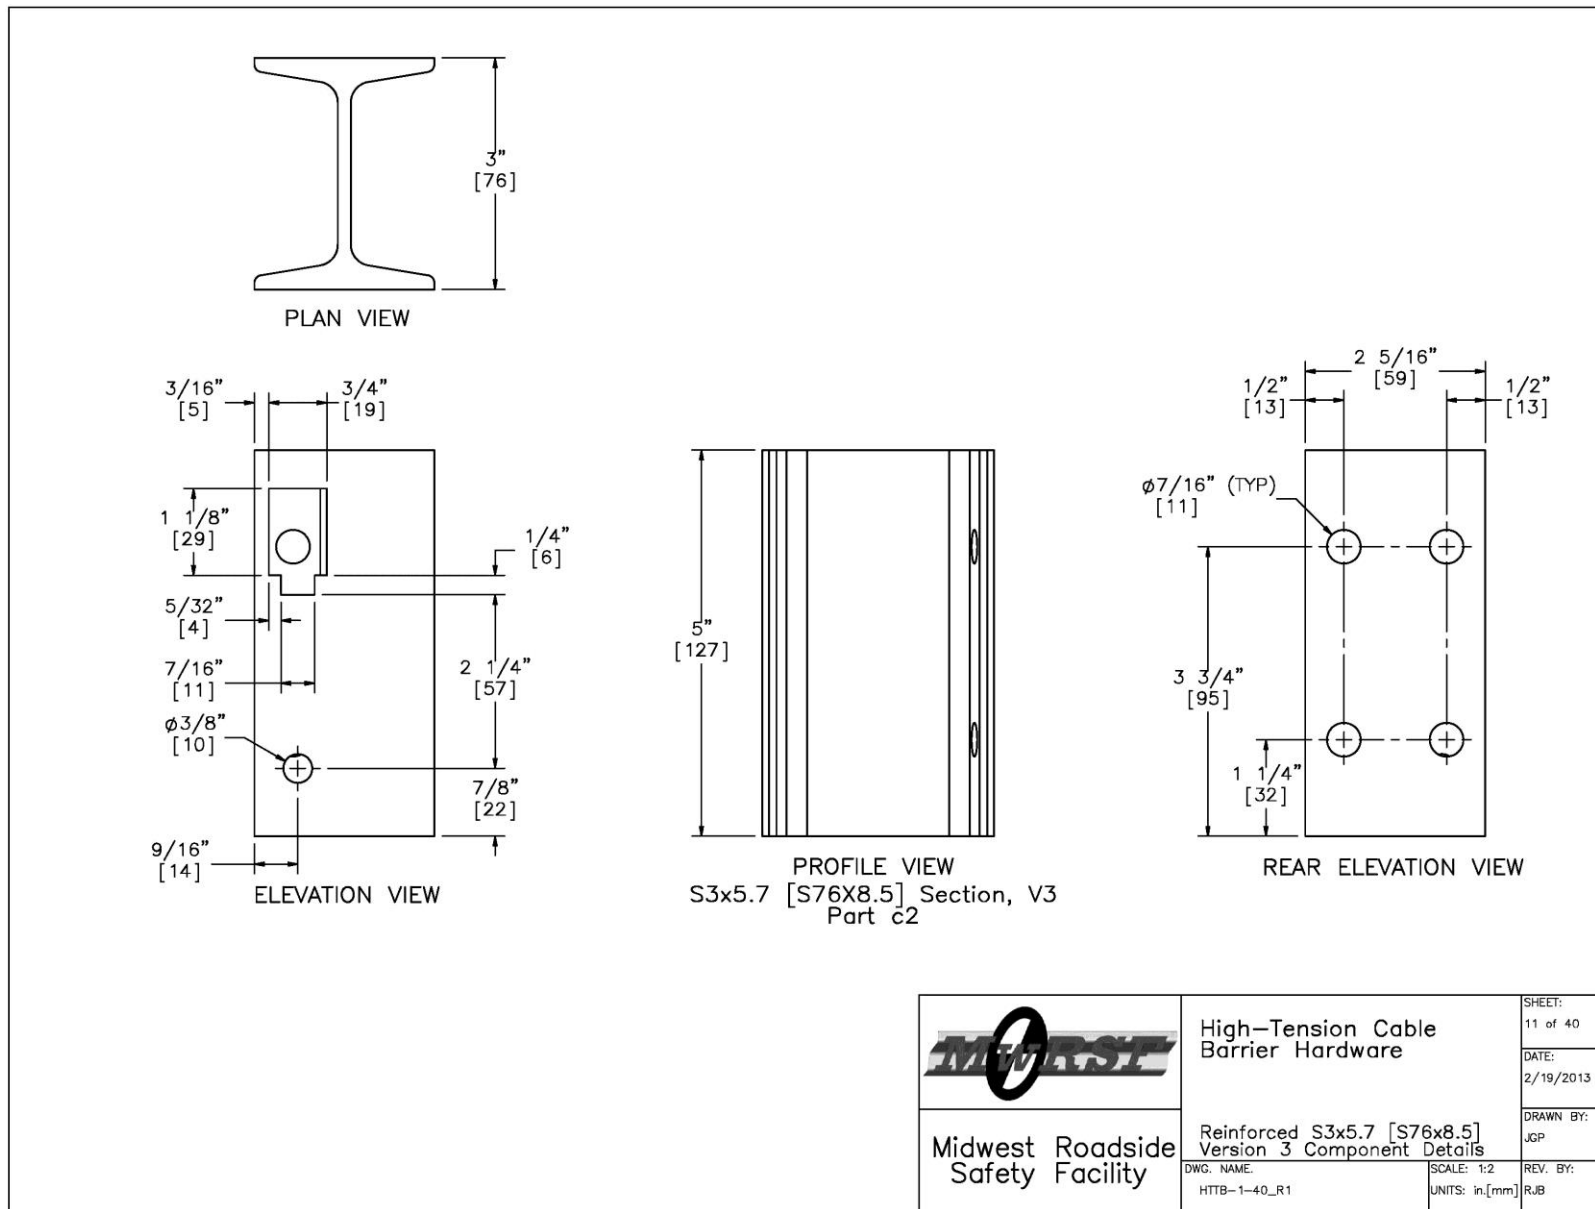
Reinforced S3x5.7 (S76x8.5) Section Version 3 Details, Test Nos. HTTB-1 through HTTB-40
